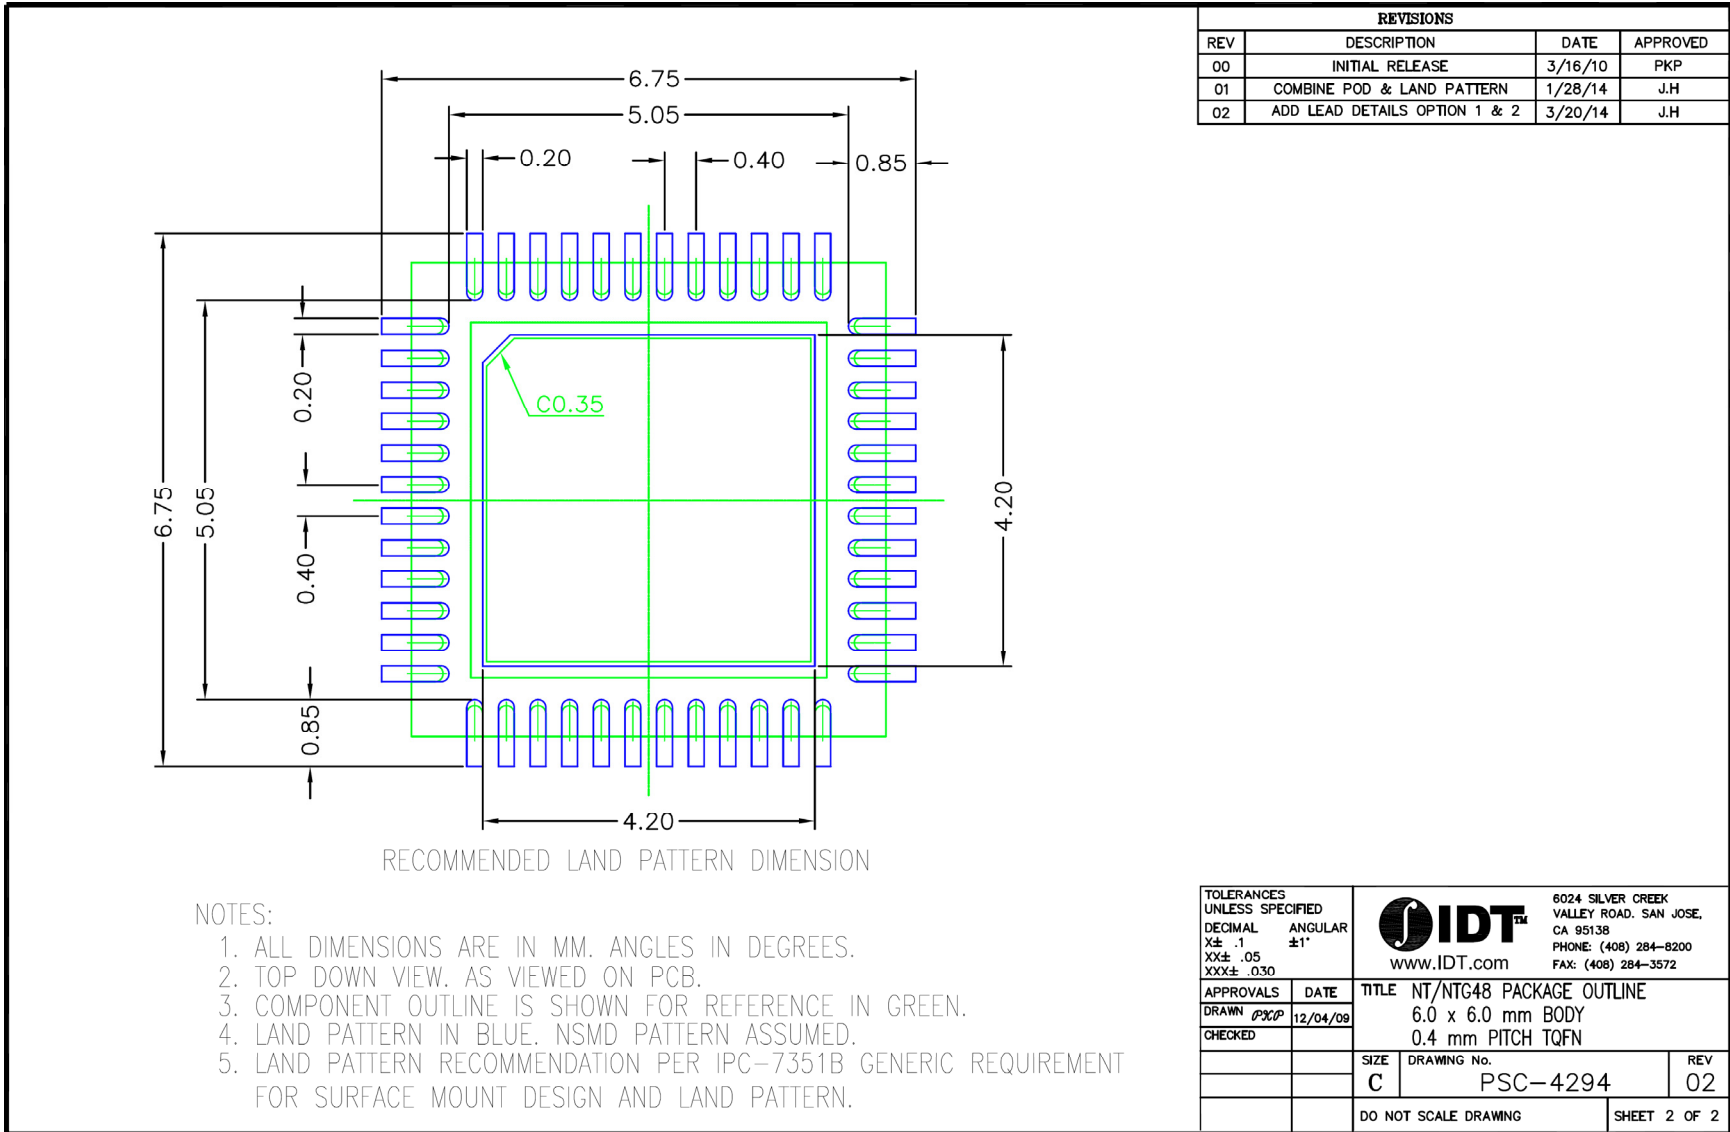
P9030 NTG48 TQFN landing pattern drawing.
